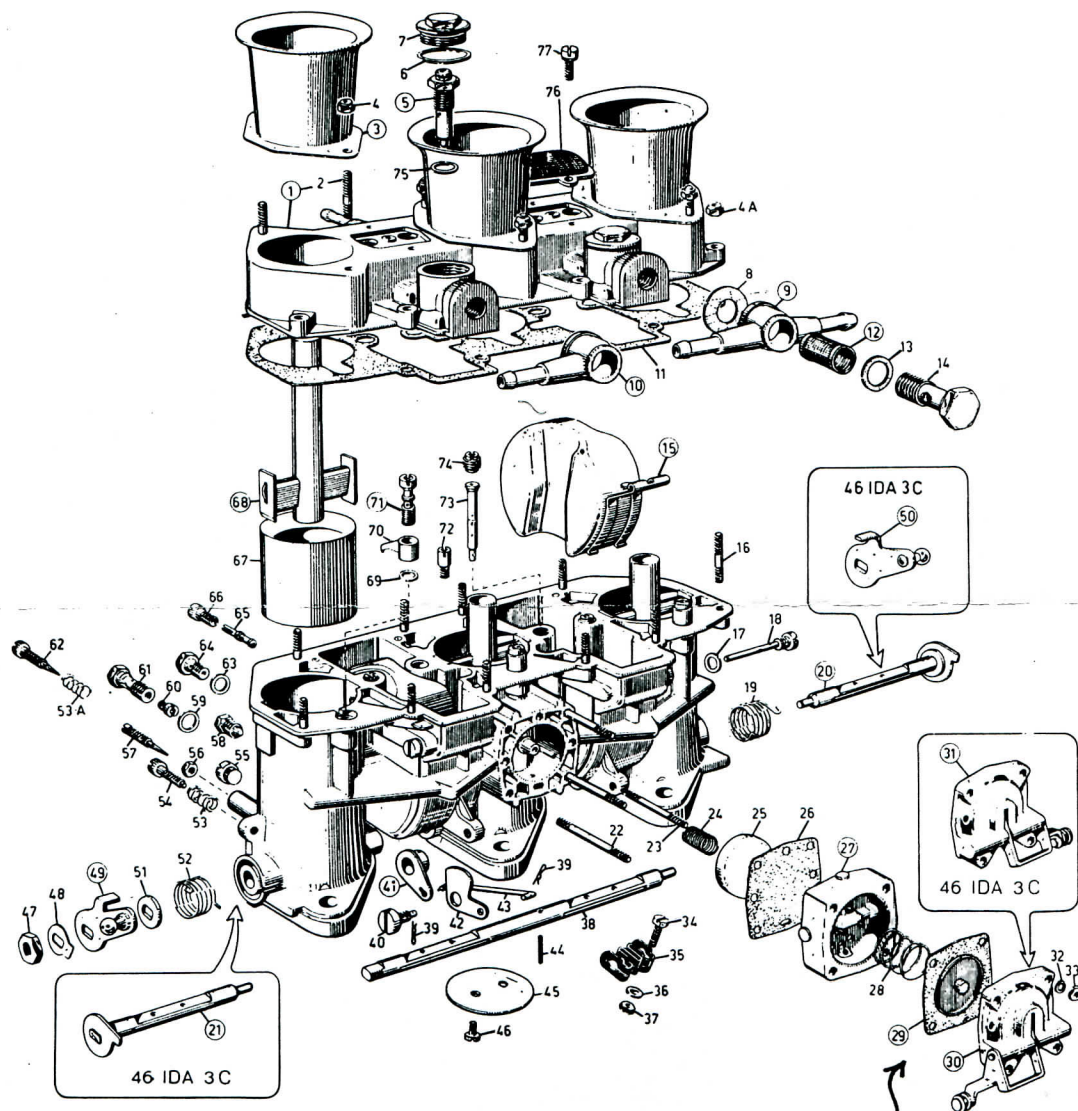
Exploded view of the 46 IDA 3C carburettor (Sec 6)
